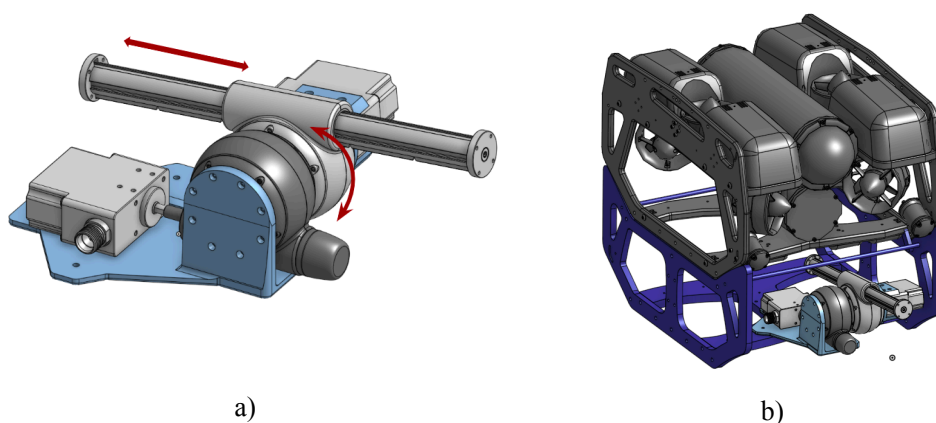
a) 3D model of a first prototype of the multipurpose tool using SER-2020 underwater servo motors from BlueTrail engineering and Igus gear boxes. b) 3D Model of the prototype installed in a BlueROV2 underwater vehicle
